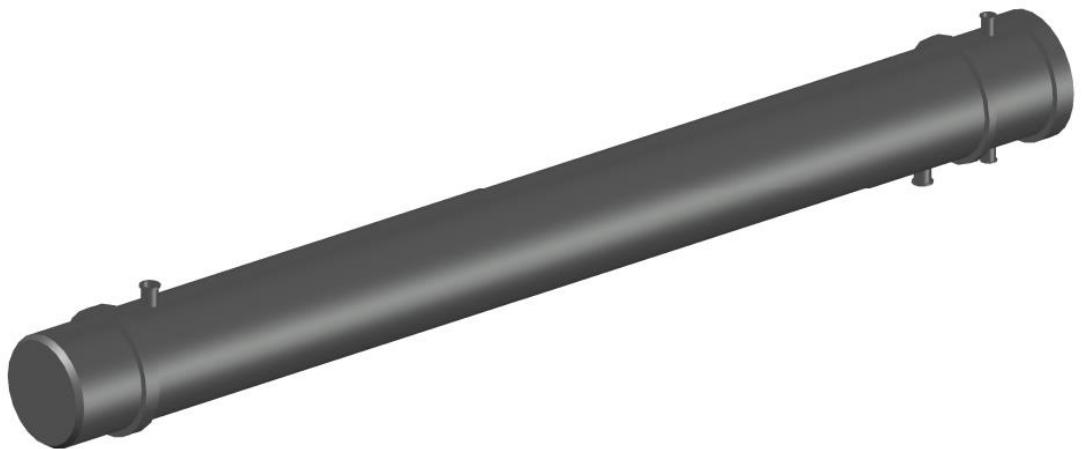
Engineering Drawing of 1-4 type of shell-and-tube heat exchanger (reality view) by AutoCAD software
